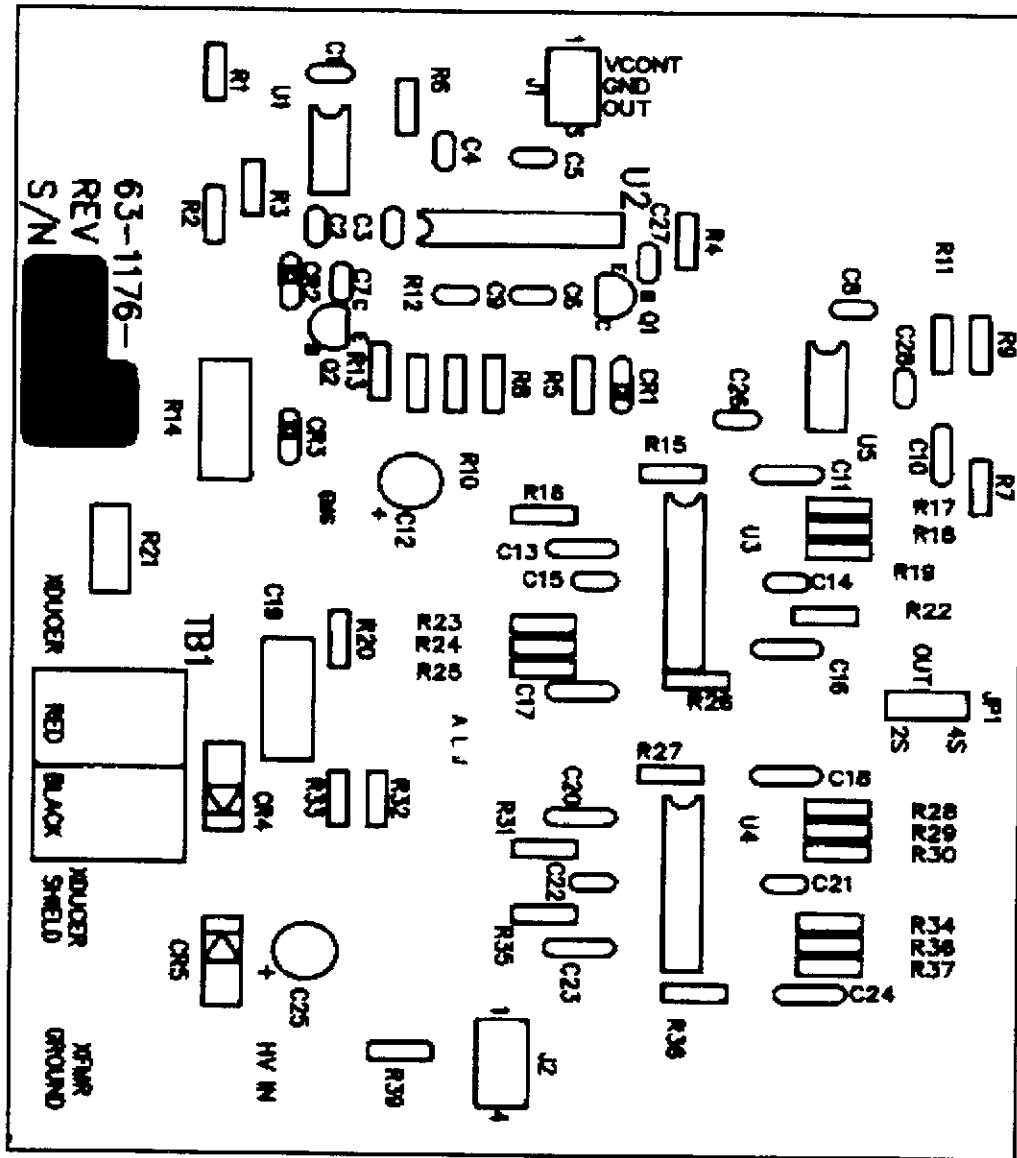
Assembly Drawing of the Filter Module Board (20-, 30-, and 50-foot Systems), P/N 63-1176.
